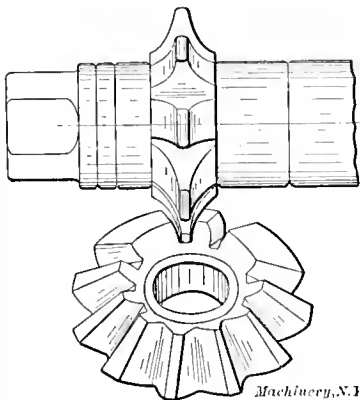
Shaping the Teeth of a Bevel Gear by the Formed Cutter Process.
